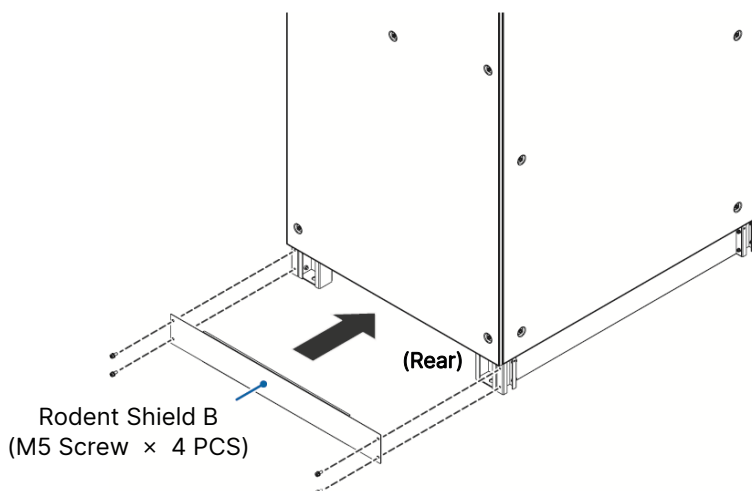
Install the Rodent Shield at the Rear of the UPS Bottom
